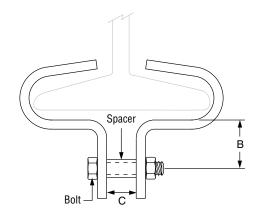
LOADS (LBS) • DIMENSIONS (IN)
